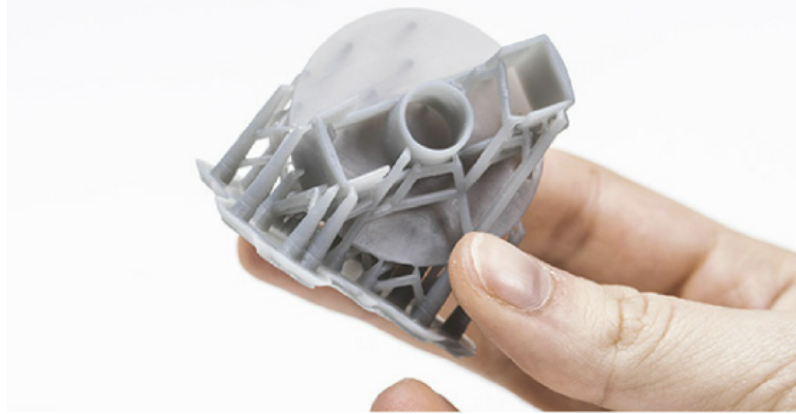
The shaft end cap after being removed from the build platform with support structures still attached [48]
